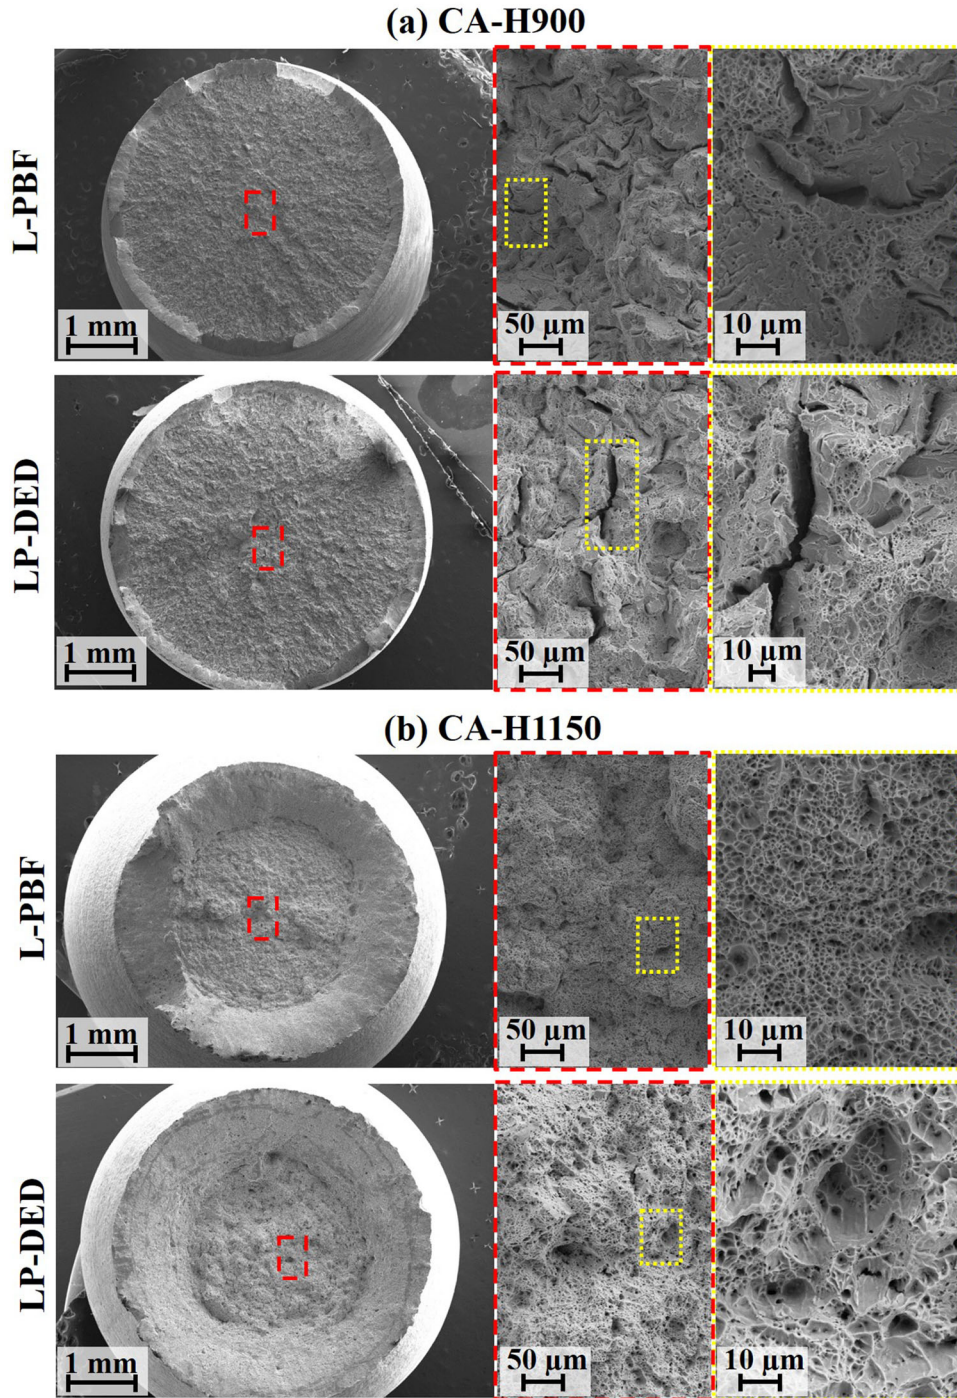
Tensile fracture surfaces of the L-PBF and LP-DED 17-4 PH SS specimens: (a) CA-H900, and (b) CA-H1150.
